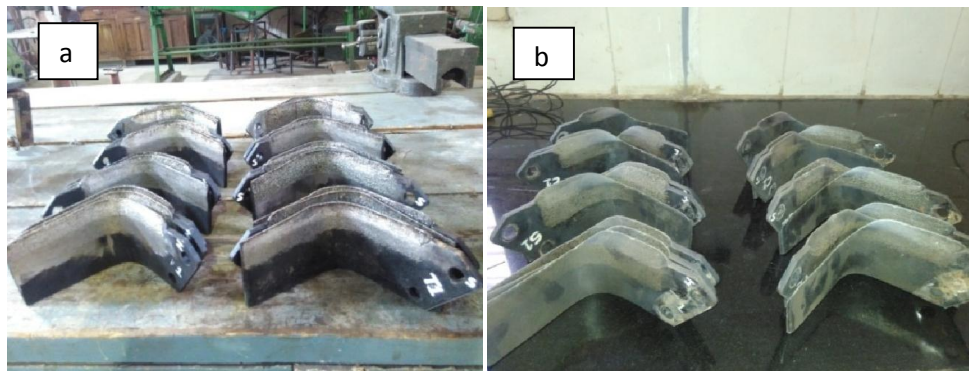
A view of ESC coated Rotavator blades before (a) and after (b) field operation
